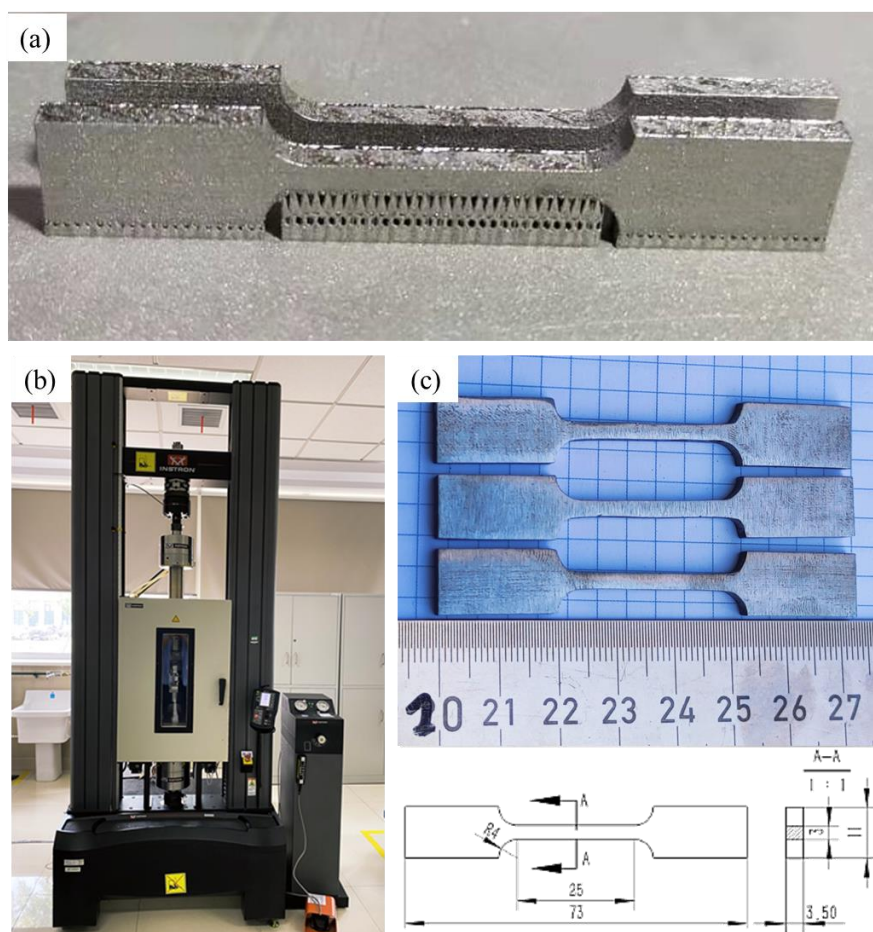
(a) The tensile samples ; (b) static tensile test machine (c) polished SLMed samples for tensile test
